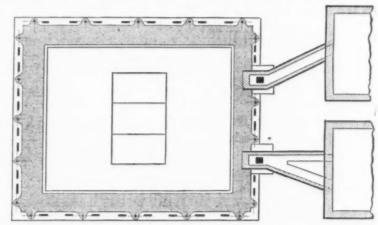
Plan of a Mold for Casting Steam Hammer Anvil.
